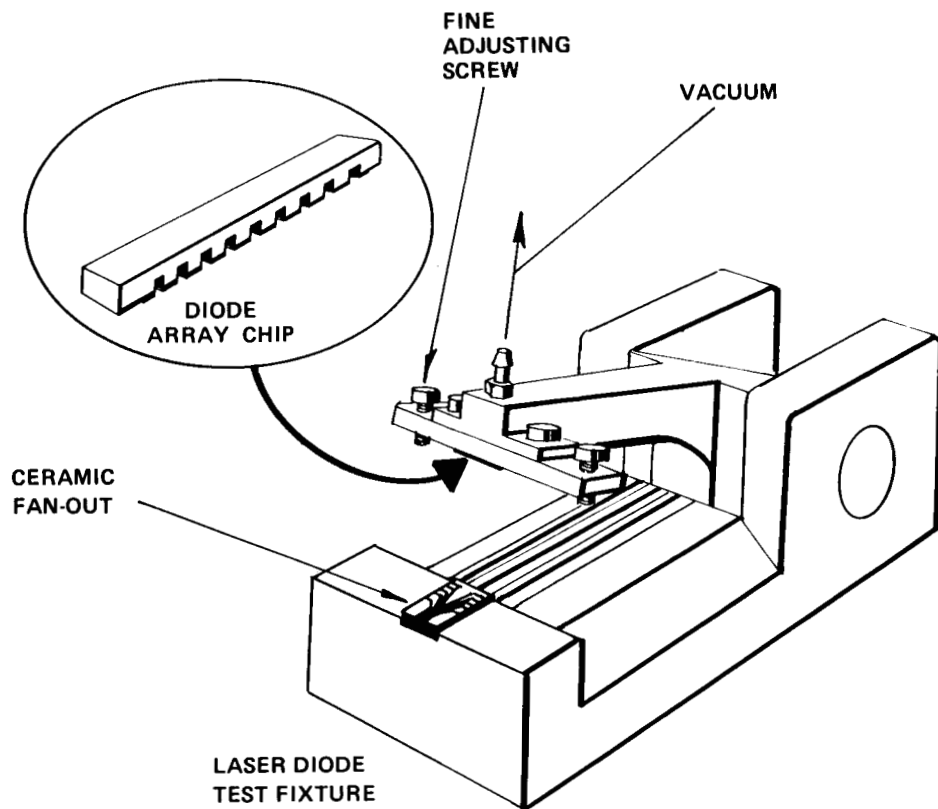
Schematic view of the array holding fixture of the semi-automated probe tester.
